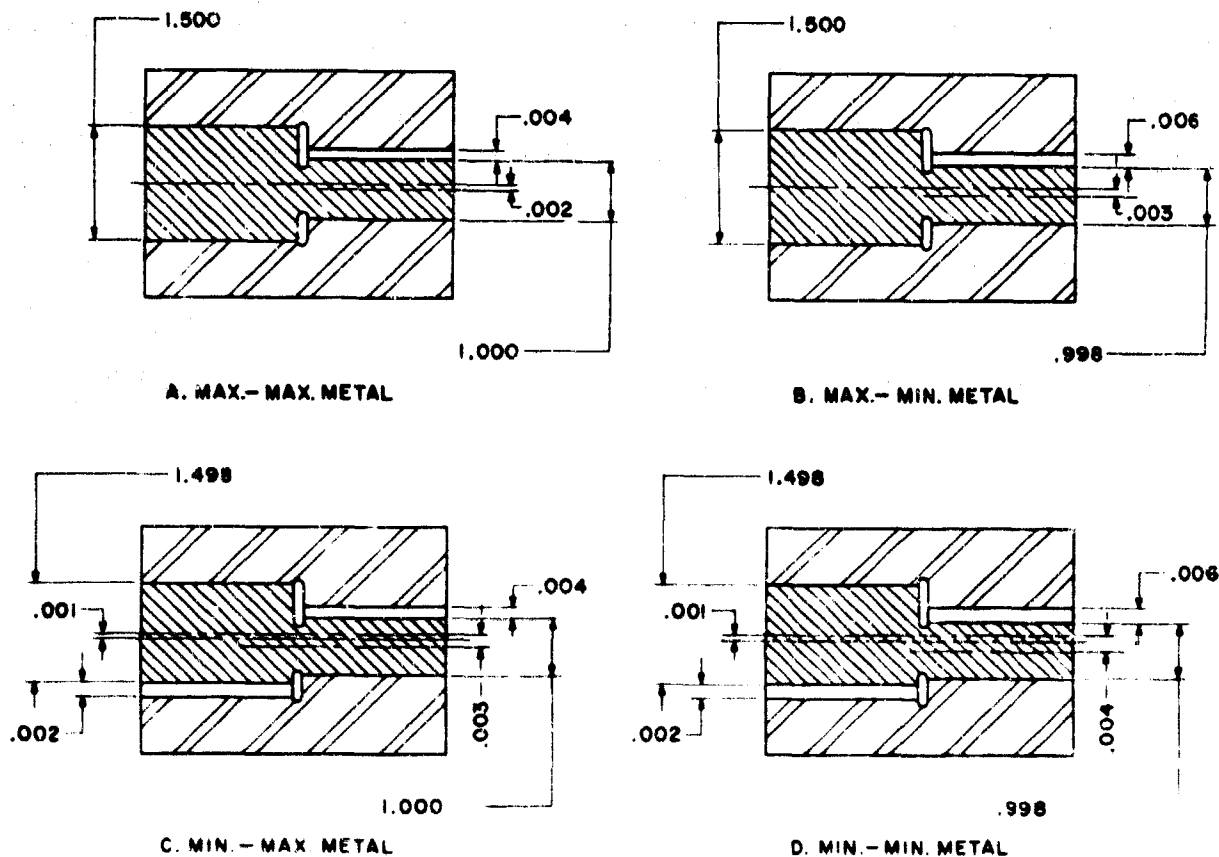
Receiver and fixed dimensions — effect of dimensional and locational tolerances
